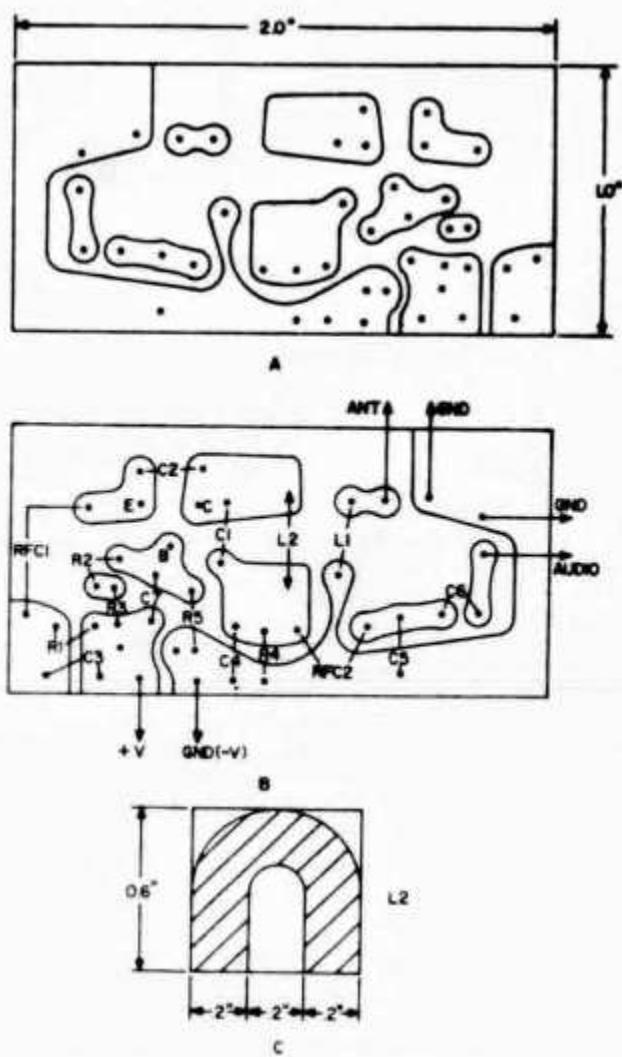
Suggested PC board layout for the receiver. The foil side is shown in 2A and parts location in 2B. The tank coil (L2) is also made from PC material and shown in 2C.
